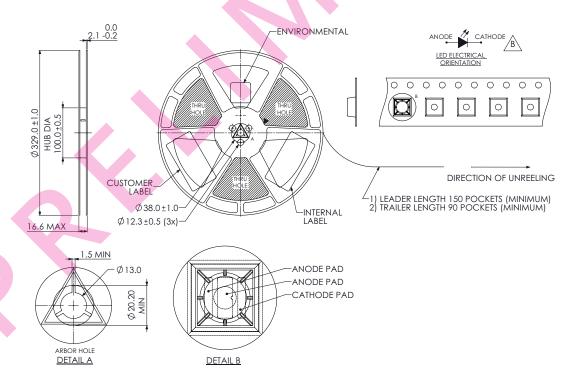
Reel dimensions for L1I0-0XXX150000000.
